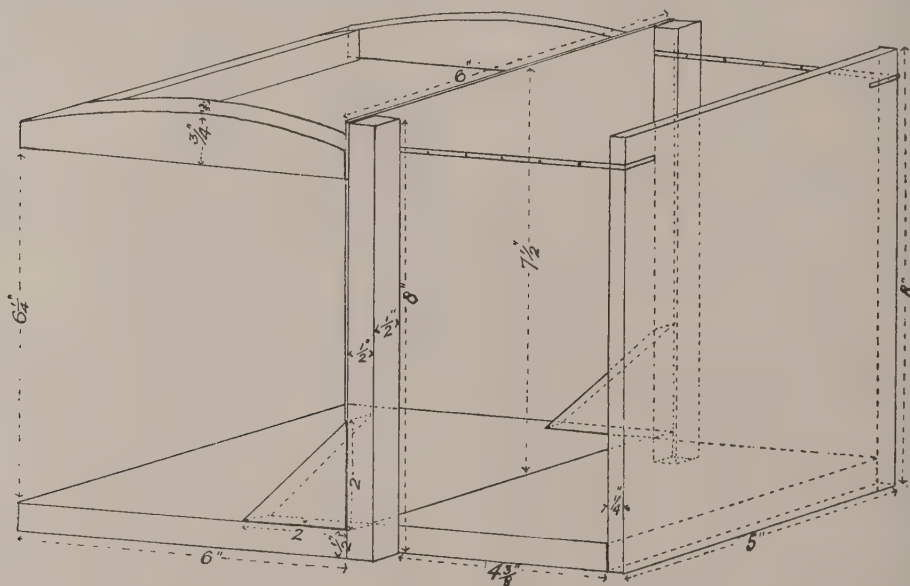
SHOWING CONSTRUCTION OF BODY.
